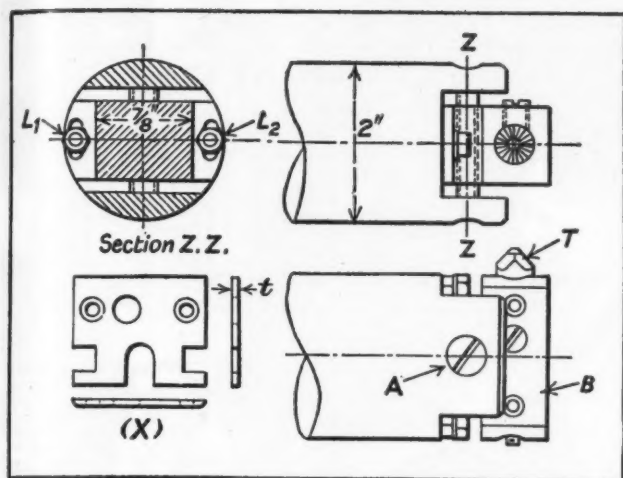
Boring-bar Specially Designed to Permit Adjustment of Tool Height
